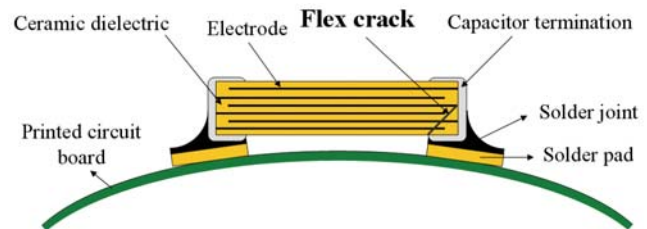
MLCC flex cracking due to printed circuit board bending.
